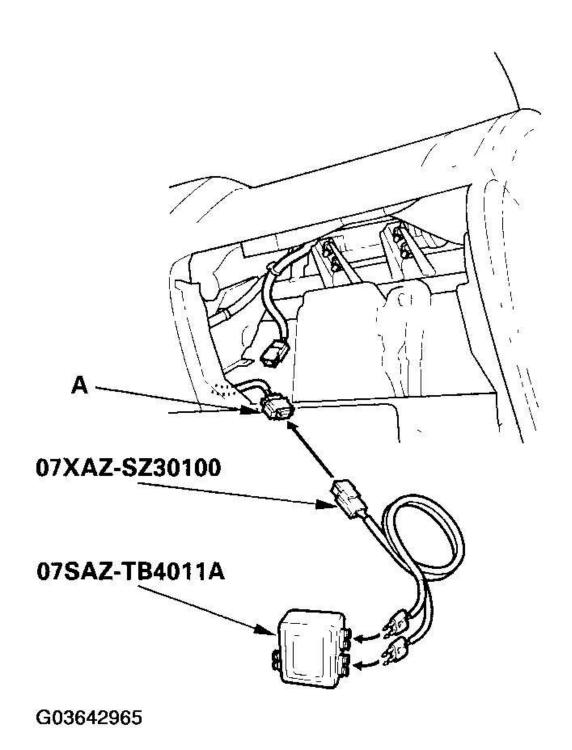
Disconnecting Front Passenger's Airbag 4P Connector From SRS Main Harness Courtesy of AMERICAN HONDA MOTOR CO., INC.
